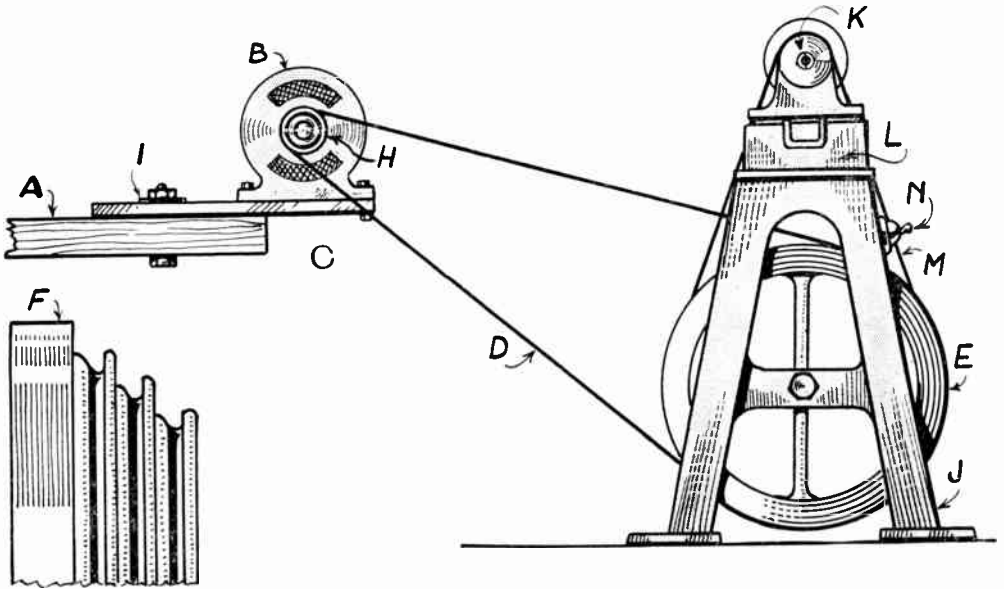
MOTOR DRIVE FOR FOOT LATHE.
